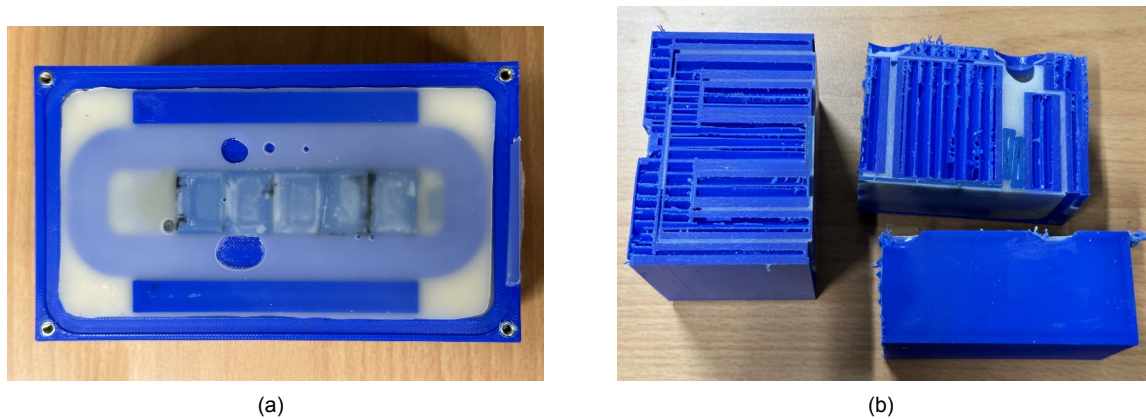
Test potting using 3D-printed actuator parts: (a) top surface after curing of the potting compound, (b) Cut assembly after curing, to check the filling of the potting compound at cross sections.
